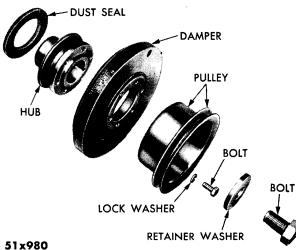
Crankshaft Pulley, Hub, Seal and Damper (Disassembled View)
